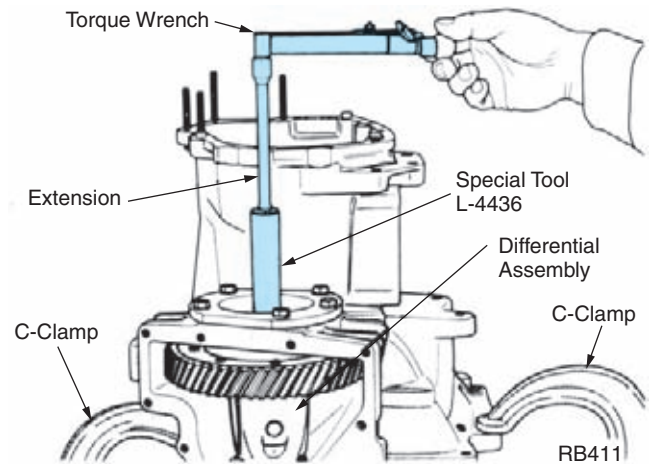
The preload or turning torque required to rotate a shaft can be measured using a torque wrench. (Courtesy of DaimlerChrysler Corporation)
